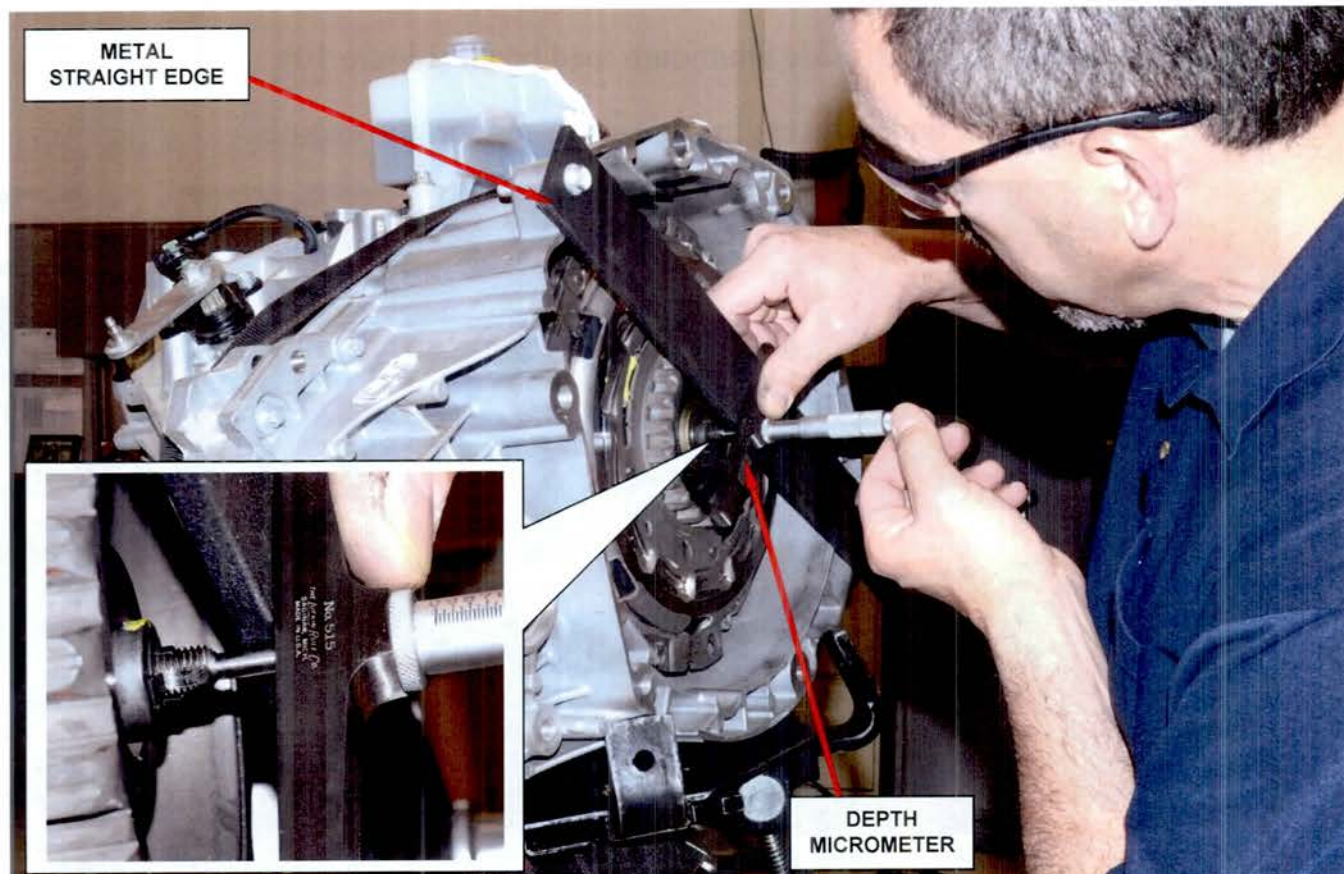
Measure and Record the Slave Cylinder Rod Depth
